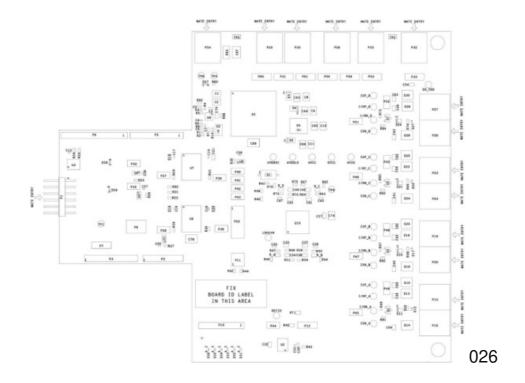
EVAL-AD74416H-ARDZ Assembly Diagram, Top View
